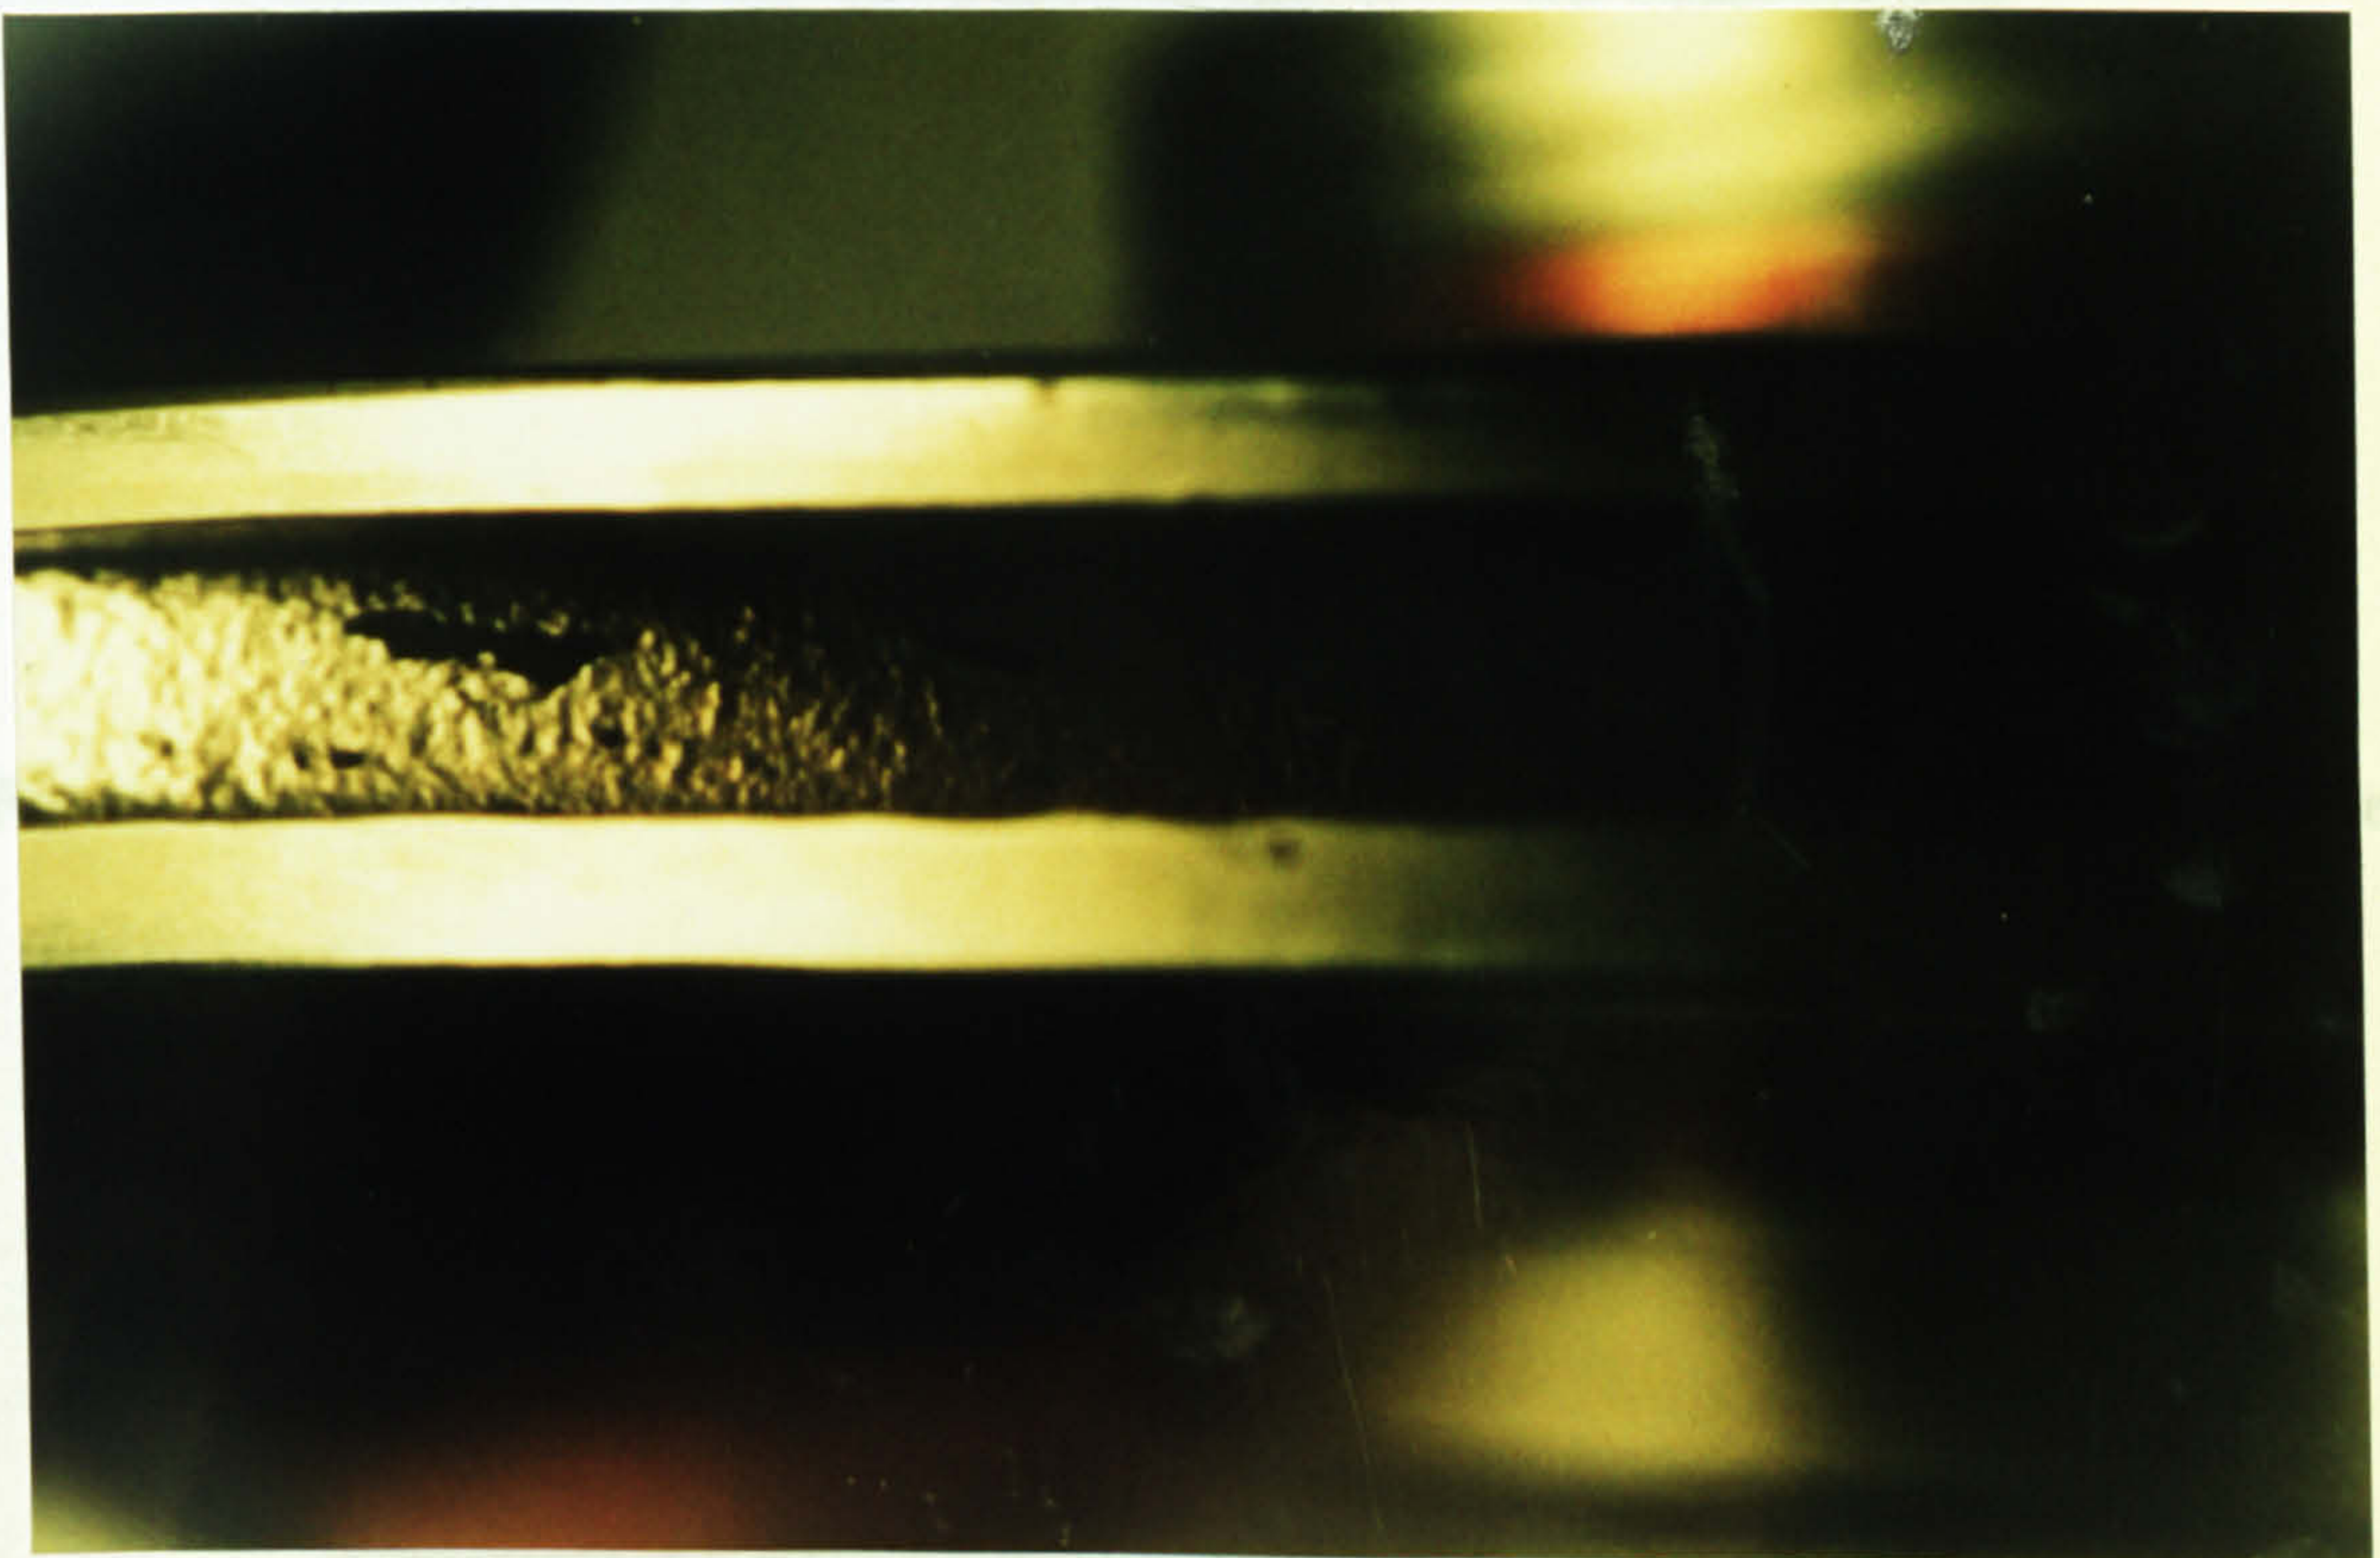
Perforation of the impeller vane due to erosion-corrosion
